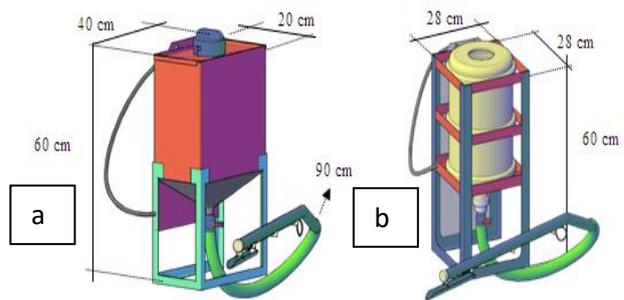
Design of Fertilizer Device (a) Type 1 and (b) Type 2
